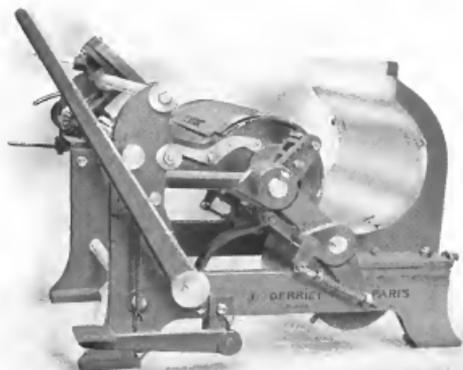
Casting-press for semicylindrical plates; opened for trimming and removing the plate.
